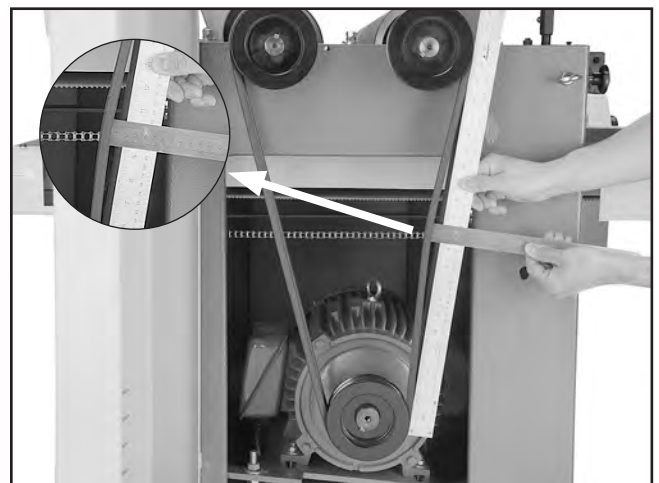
Checking V-belt tension with a straightedge and a ruler.
